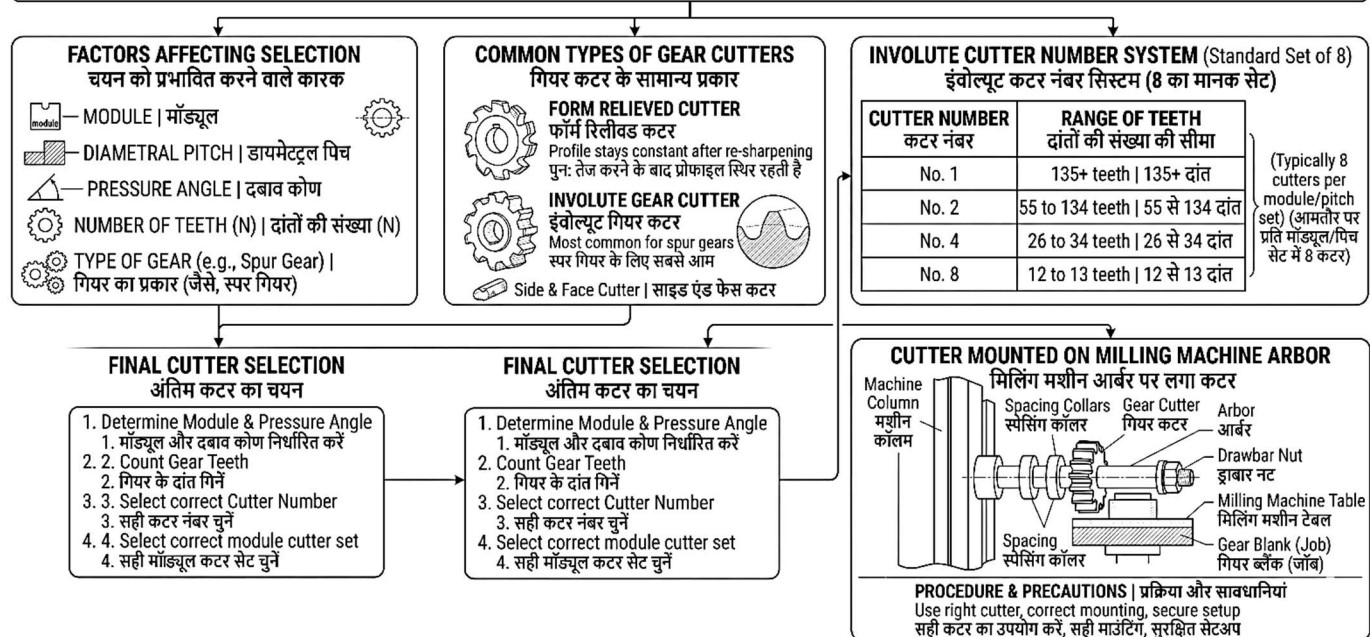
Selection of Gear Cutter and Cutter Forms | गियर कटर का चयन एवं उसके रूप
